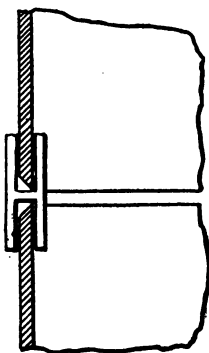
Diagram showing use of jig for maintaining correct alignment and distance during the welding of vertical cylindrical sections.
